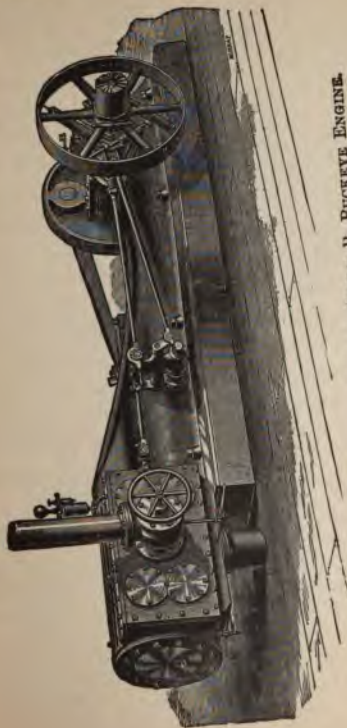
BACK VIEW, TANGYE BED OR STYLE B, BUCKEYE ENGINE.
